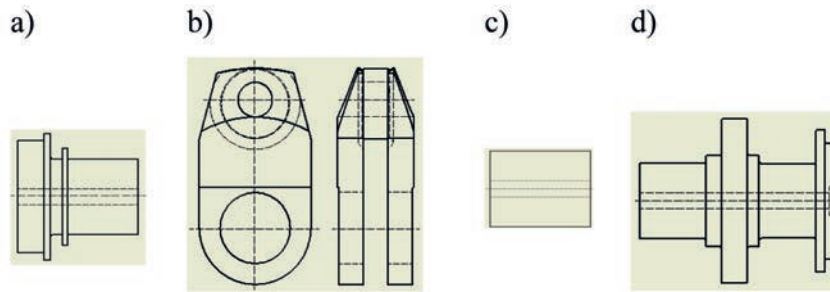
Elements of the assembled crankshaft: a) supporting journal, b) crank, c) main journal, d) journal with flange [16]
